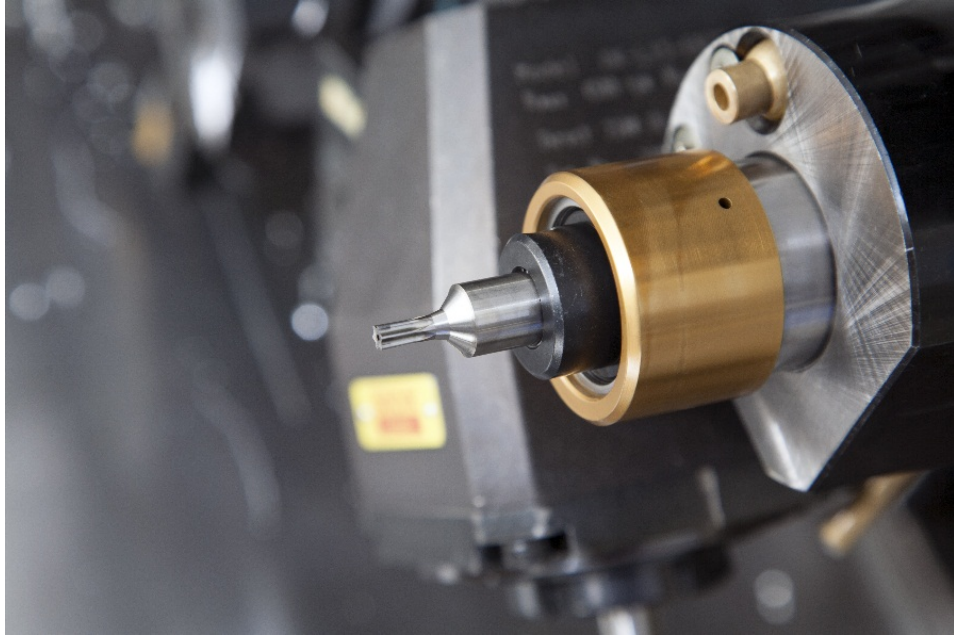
Rotary Broach Cutter and Tool Holder in the OKUMA CNC Lathe
